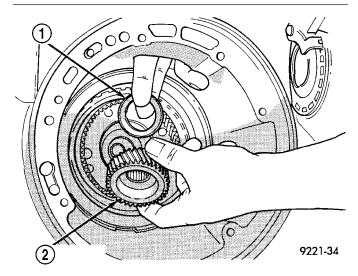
Install Rear Sun Gear and #7 Needle Bearing
